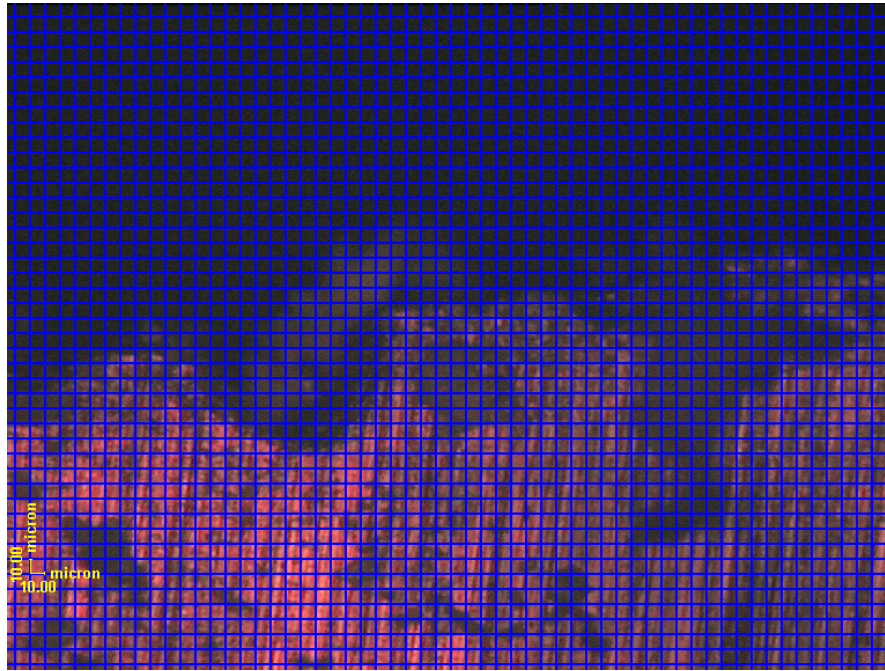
(c) Flank wear at diameter 10mm, spindle speed 19.78m/min and feed rate 0.25mm/rev
